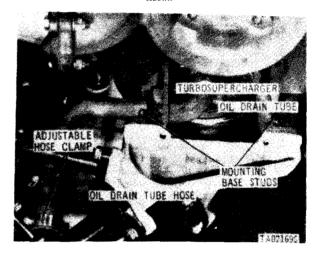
Loosening or tightening turbosupercharger oil drain tube hose connections.
